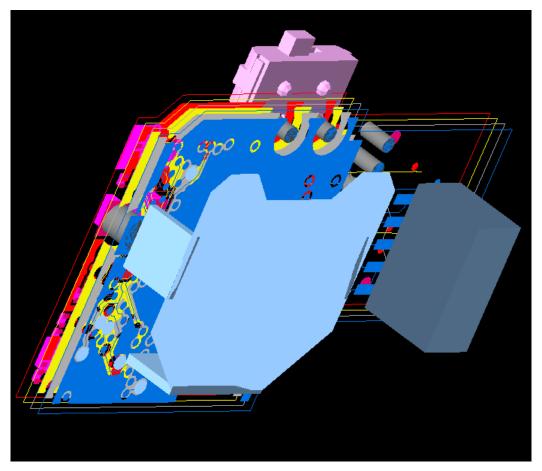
IoT Sensor reference board: 3D bottom view with battery holder (Rev. F)
